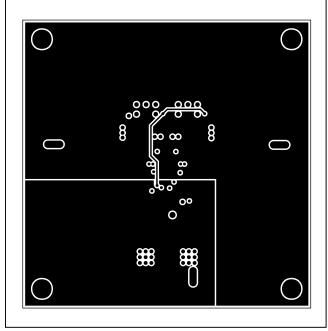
MAX17509 EV Kit PCB Layout—PGND Layer 3
